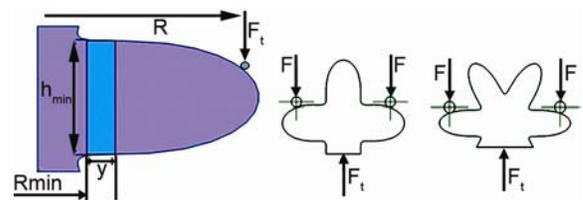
Schematic view of loads on gears for fatigue test (a) detailed view of loading, (b) 4 teeth gear loading and (c) 6 teeth gear loading
